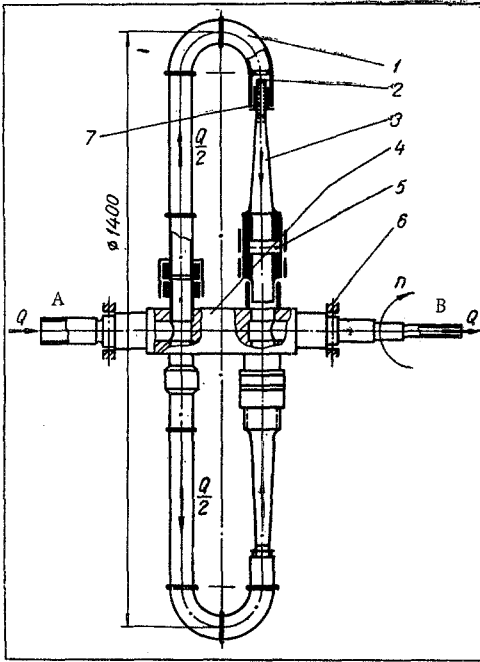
Diagram of the experimental installation. The rotor assembly: 1) tubular knee; 2) distribution grid; 3) conical chamber; 4) shaft; 5) device with grid, for supply of particles; 6) roller bearing; 7) layer of material being tested.
